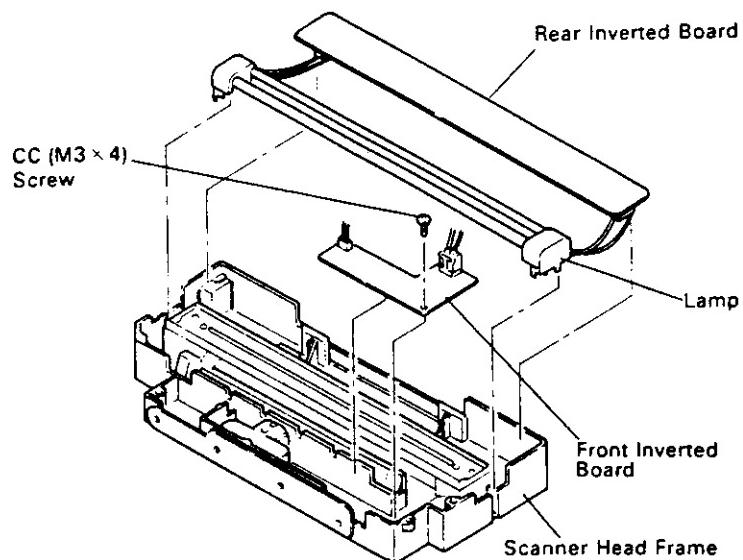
Rear Inverted Board, Front Inverted Board, and Lamp
